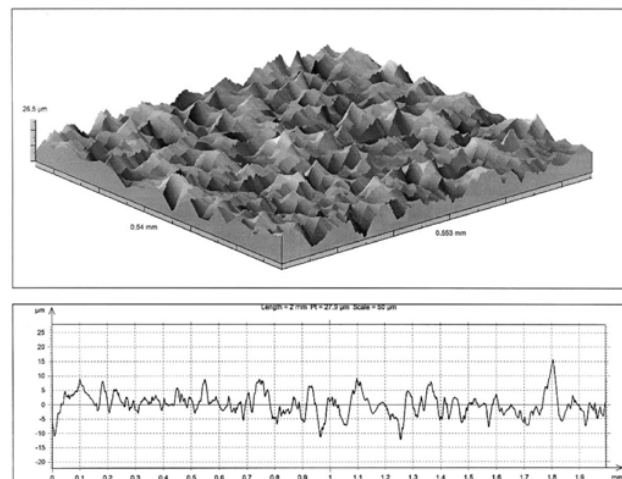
Roughed surface in two and three dimensions after grit blasting [2]
